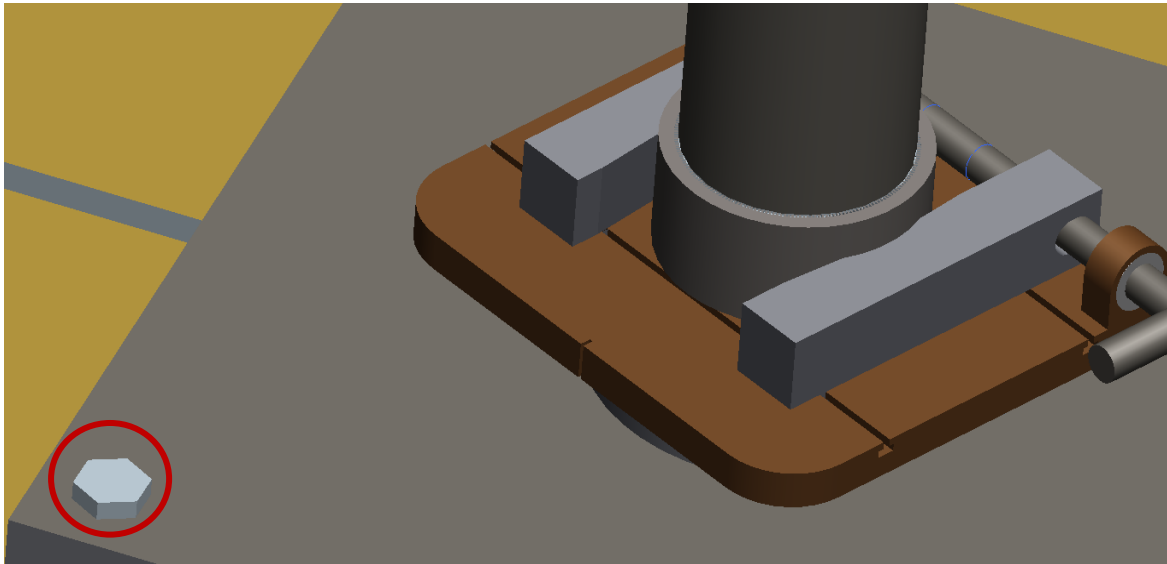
Attachment of the ring clamping tool to the electro-mechanical test-rig.
